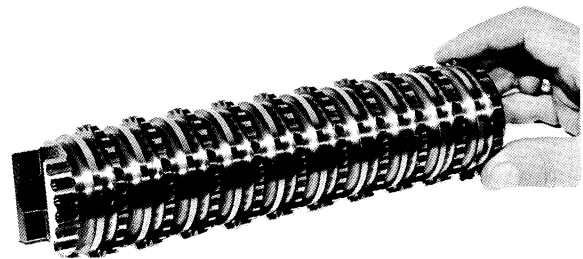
The finishing shell on a Red Ring concentricity broach for a 2.1667-in. dia truck transmission gear splined hole.
